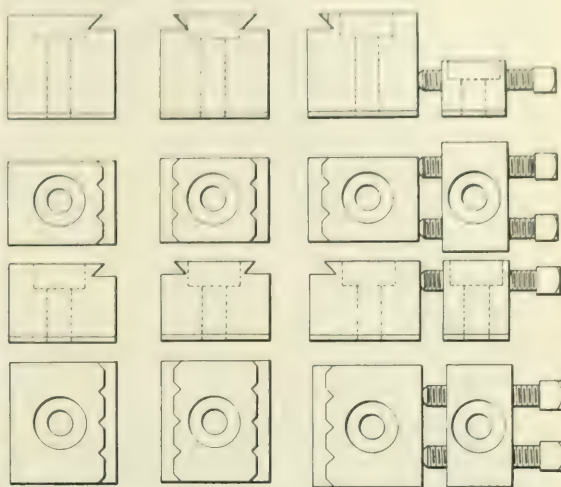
Chuck Blocks for Shoes and Wedges and Crosshead Gibs.
